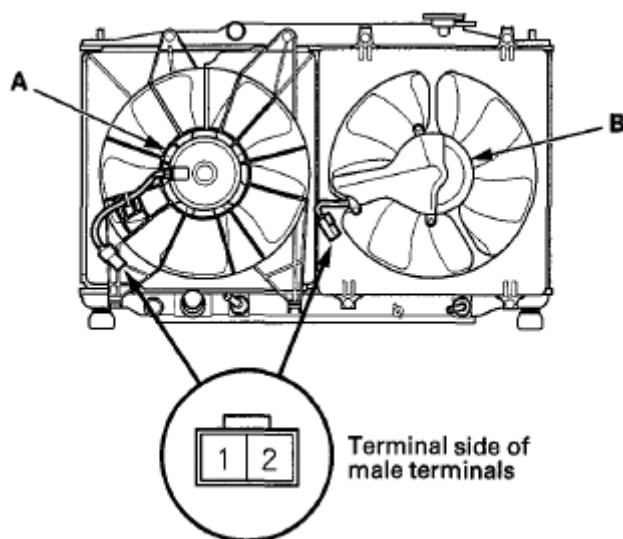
Identifying 2P Connectors Of Radiator Fan Motor And A/C Condenser Fan Motor
